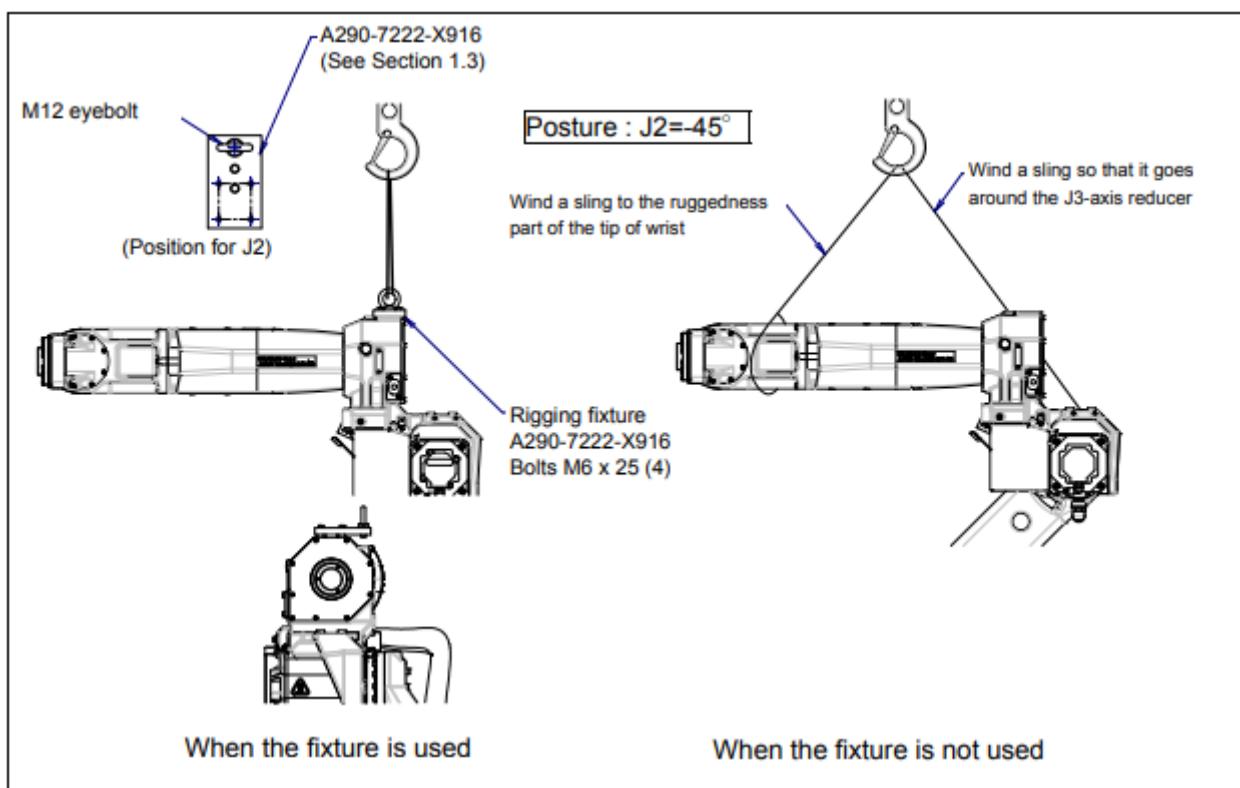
(b) Hanging method of the J2/J3 arm
